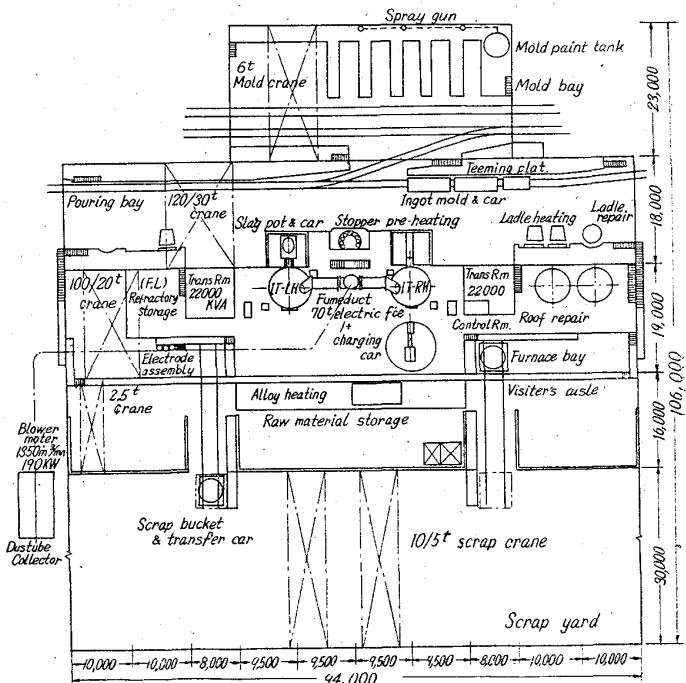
Layout of a melting shop at Chita works. (Daido steel)
